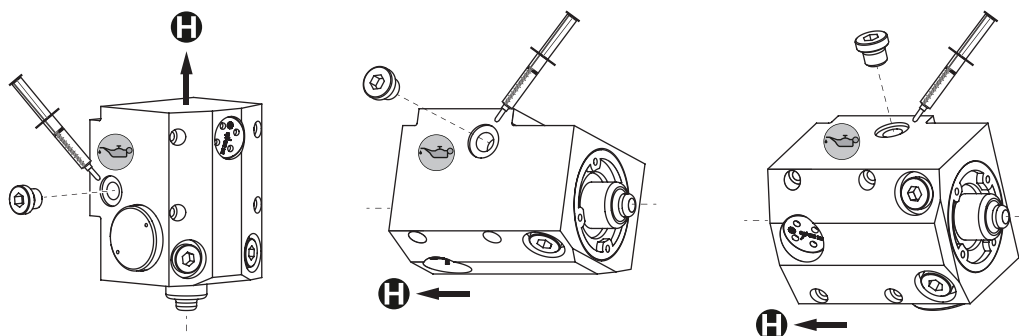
The position of the filler screws depends on the mounting orientation. Example: Standard versions
